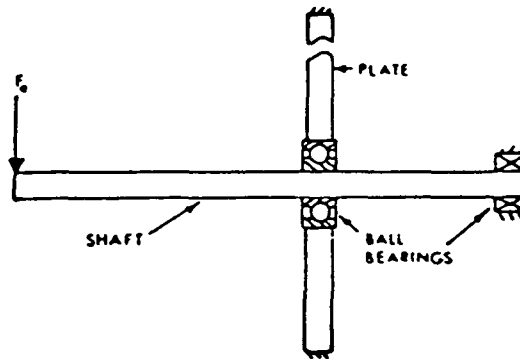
Shaft-bearing-plate setup for bearing transmissibility studies [32]
